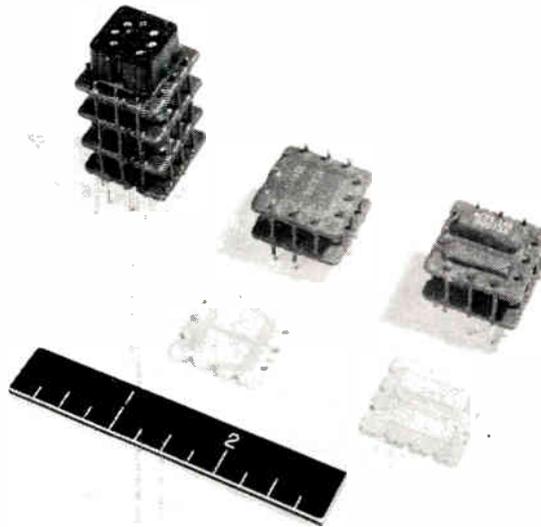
Mechanize Production of Ceramic Wafer Assemblies
